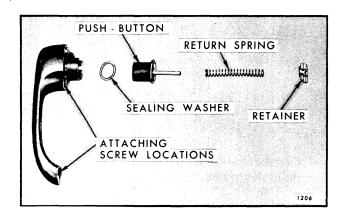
Front Door Outside Handle - Push-Button Handles ("X" Styles Shown, "B-C" Styles Similar)
